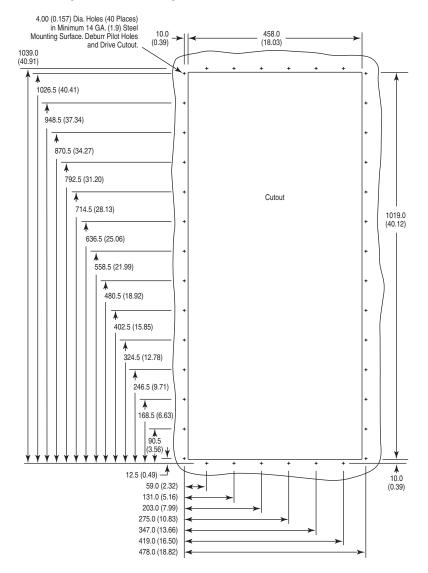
Frame 5 NEMA/UL Type 12 Flange Mount (400-690V drives only)
